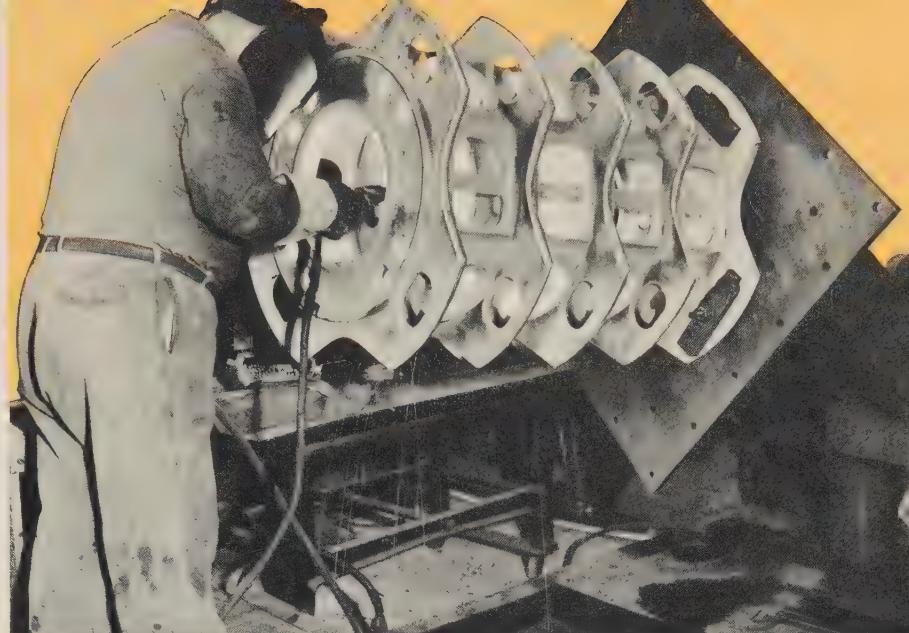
The first crankcases produced were fabricated entirely by hand welding techniques using a power-driven welding positioner. The hand welding method of fabrication served as a basis for the development of welding procedures and fixtures necessary for the production run.
